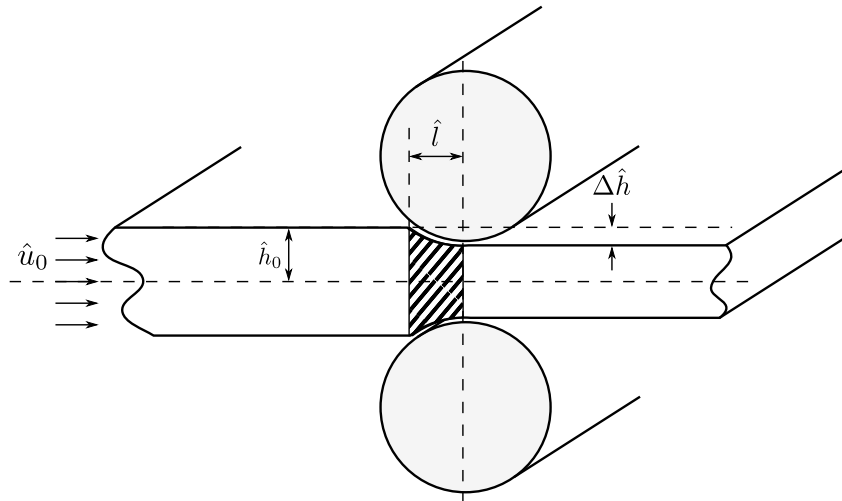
A cross-sectional schematic of rolling indicating the relevant dimensions.
